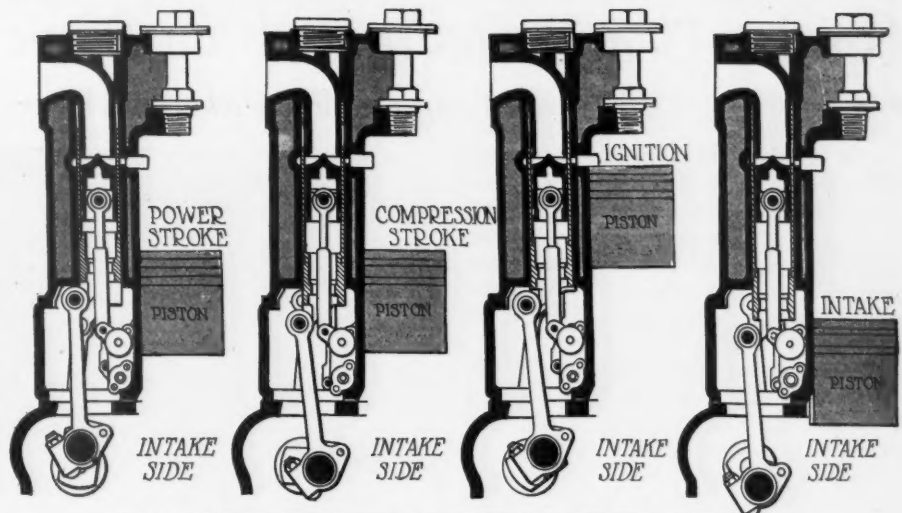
POSITIONS OF THE ROCKEFELLER SLEEVES AND PISTON
